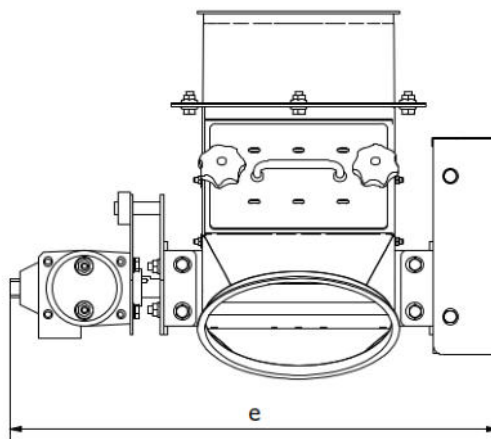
Side view -Asymmetrical with pneumatic motor (P-).
